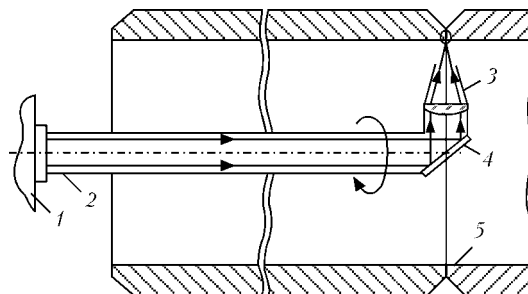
Scheme of orbital welding of a root weld for assembly of pipe butts: 1 – CO₂ laser; 2 – rotary beam conductor; 3 – laser welding head; 4 – rotary mirror; 5 – position butt joint
